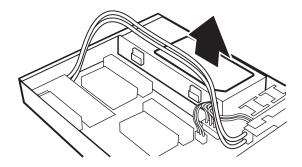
Lifting the SAS Cables Out of the Clamps
